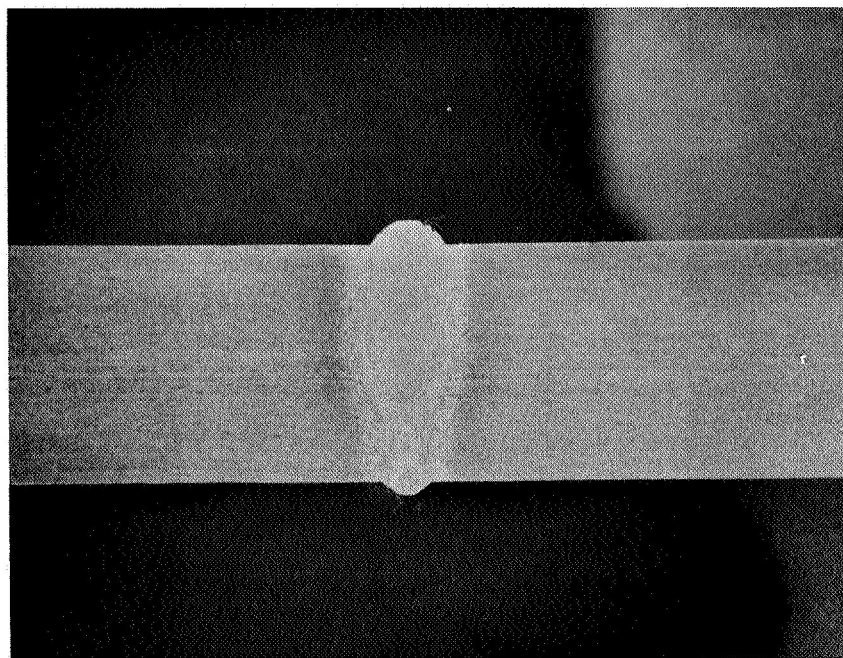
Weld Cross Section and X-ray Photograph of Weld No. 419,
